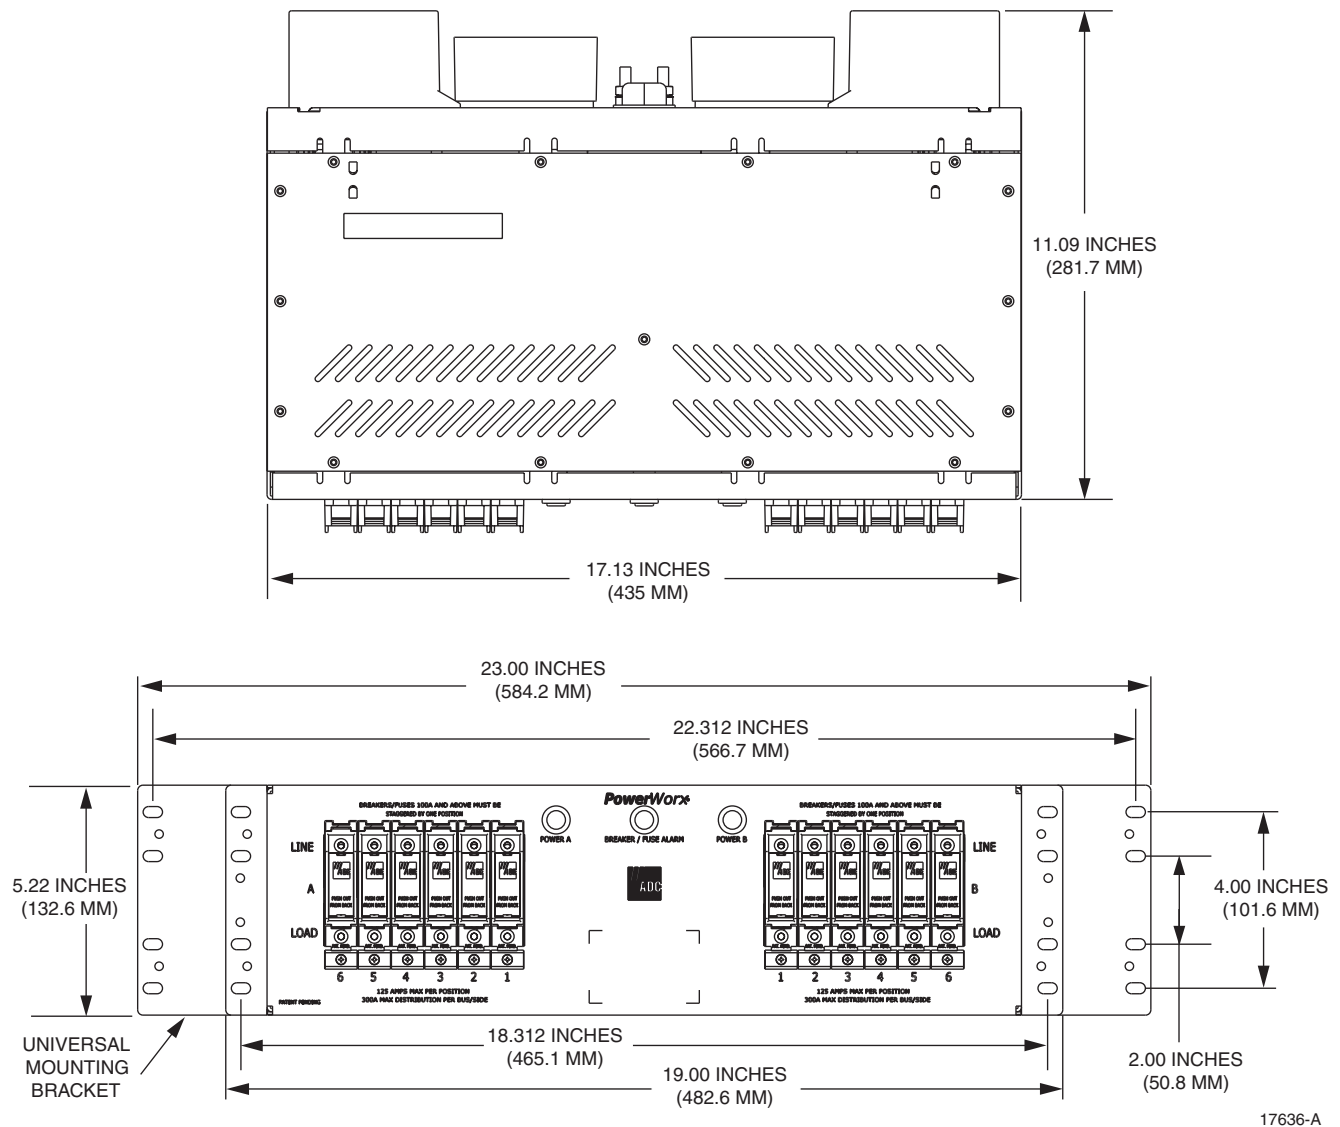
Dimensions of Advantage Series Breaker/Fuse Panel
